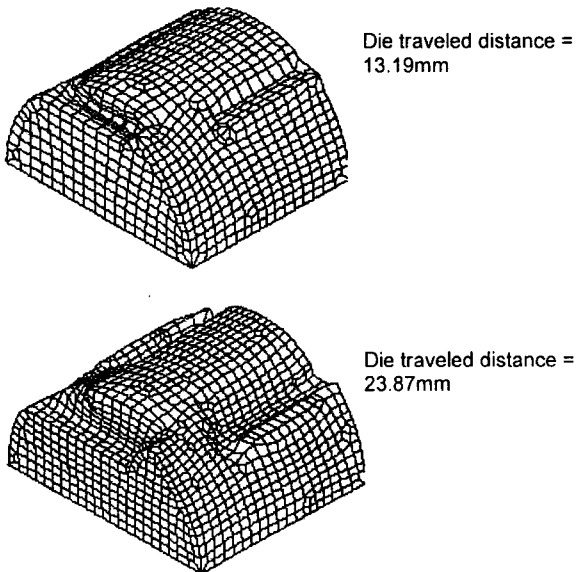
INTERMEDIATE SHAPES OF THE WORKPIECE IN FORGING OF A CRANK SHAFT (AFTER MESH GENERATION).
